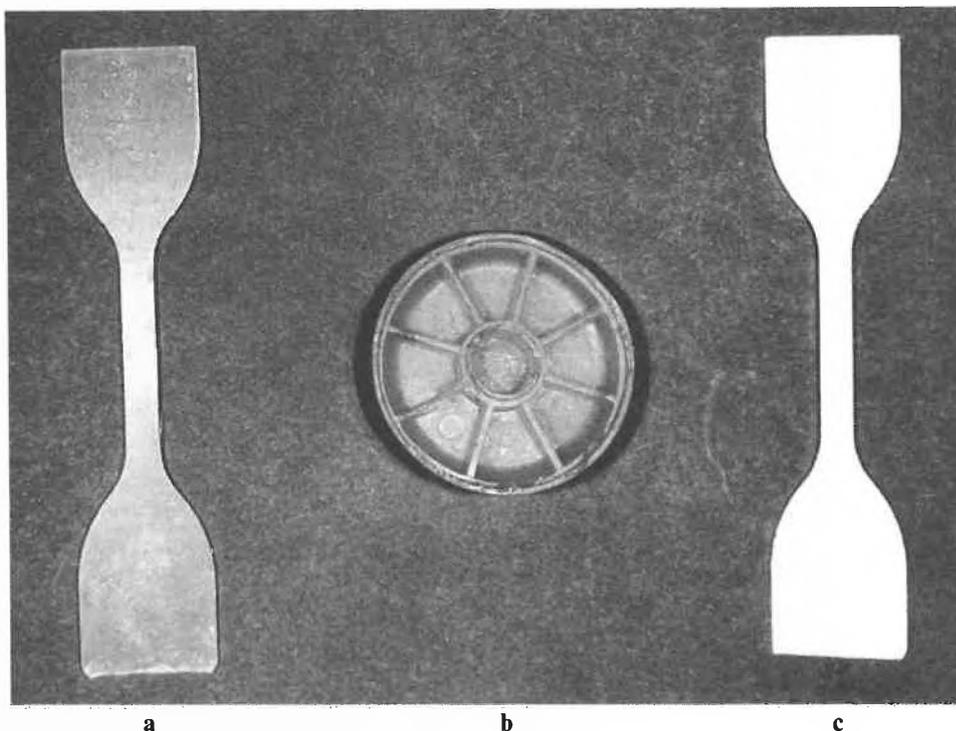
Photographs of injection-mouldings: (a) opaque tensile test-piece, (b) circular moulding, (c) clear tensile test-piece.
